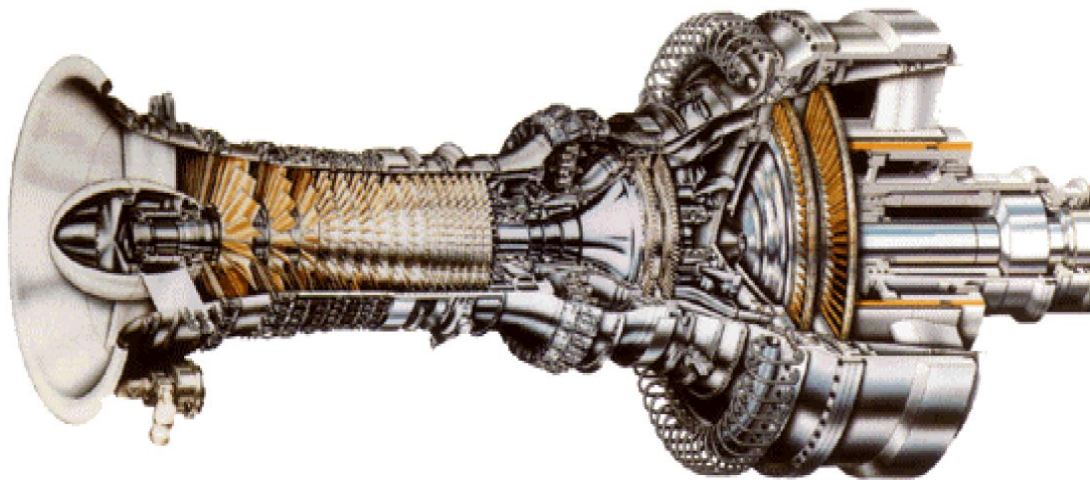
D. A gas turbine (LM2500+) showing the compressor part at the intake on the left [Ref. 61]
